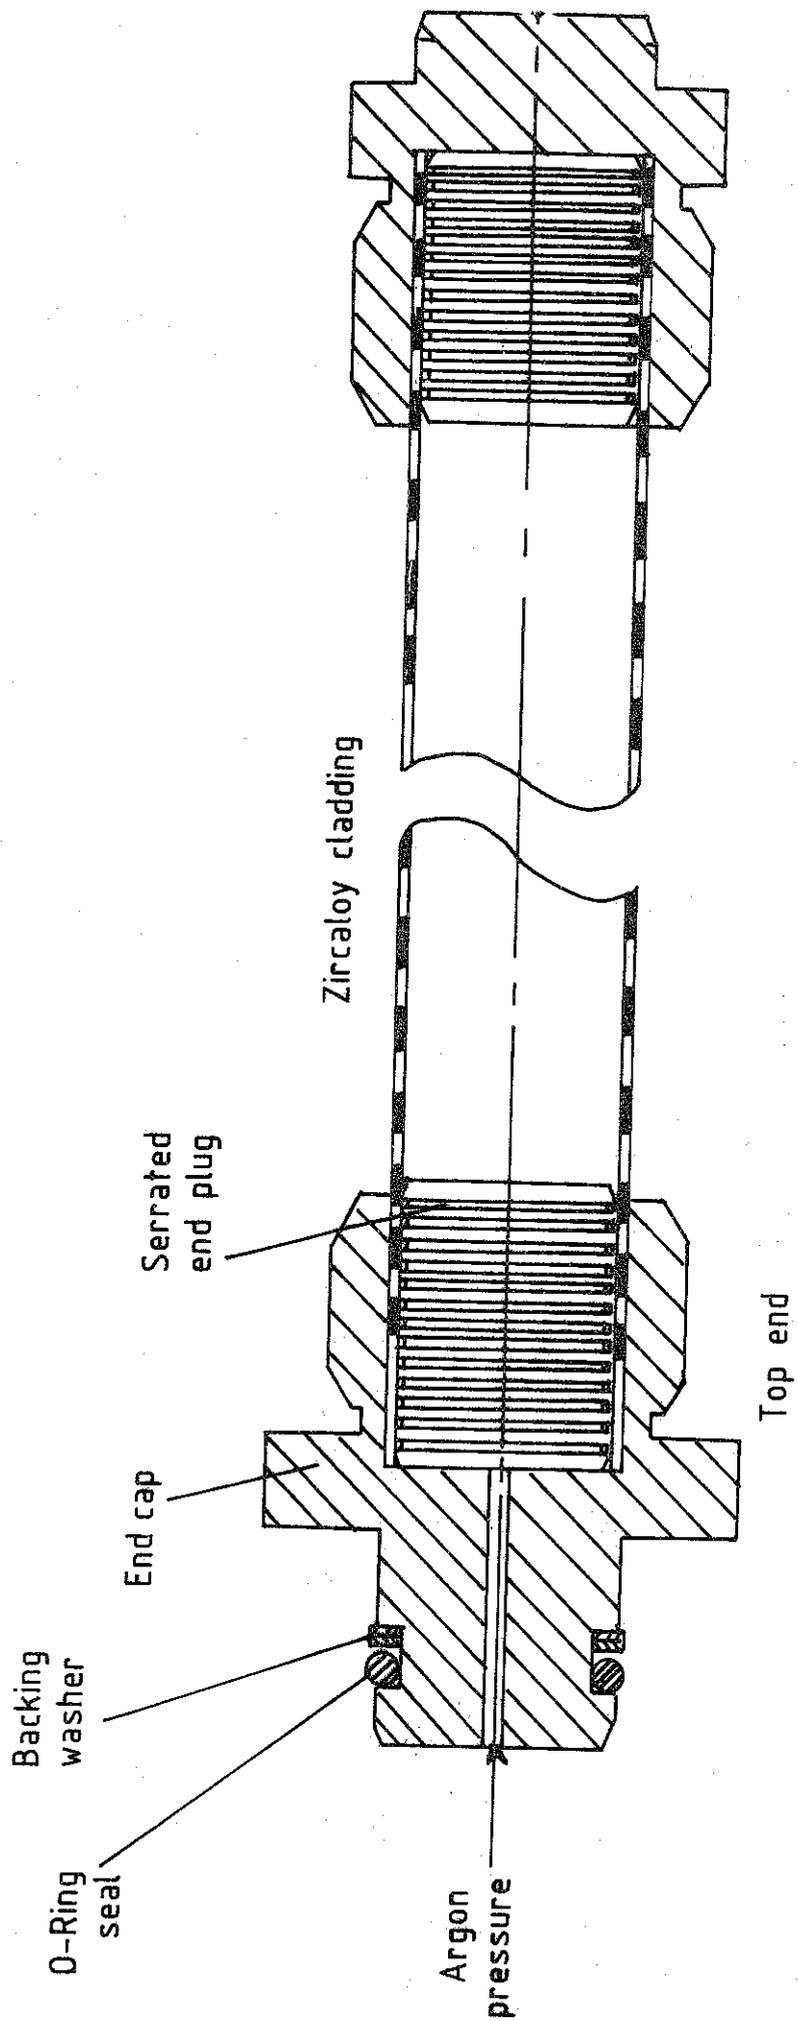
LOCA TEST-PIECE - VACUUM/PRESSURE END-SEAL ARRANGEMENTS
